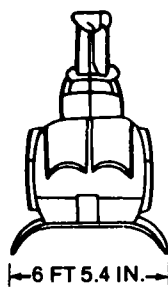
Principal Dimensions, OH-58C (Kiowa) Standard Skid Gear
